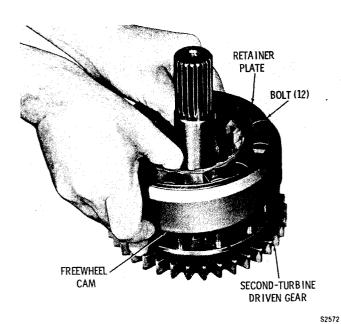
Installing assembled cam onto assembled second-turbine driven gear
